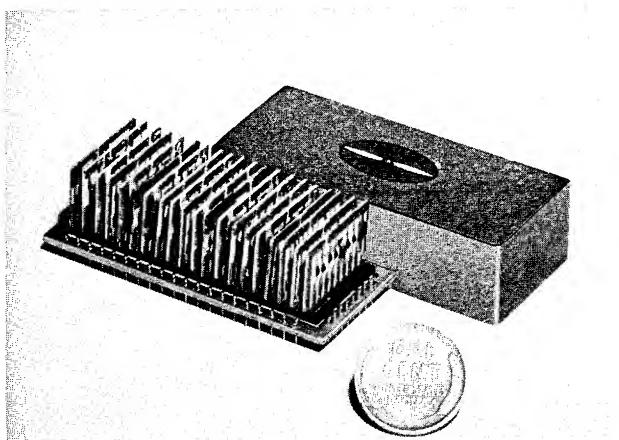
Electron beam welded module, hermetically sealed.
